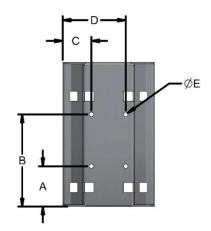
Heavy Duty Mounting Bracket Bolt Pattern
